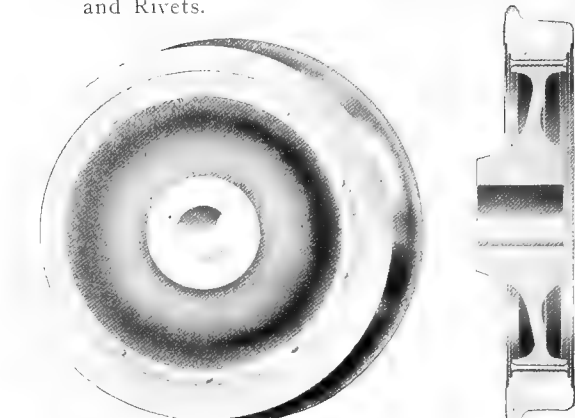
Cast Steel Plate Center with Tire Held by Shrinkage, Mansell Retaining Rings and Rivets.
